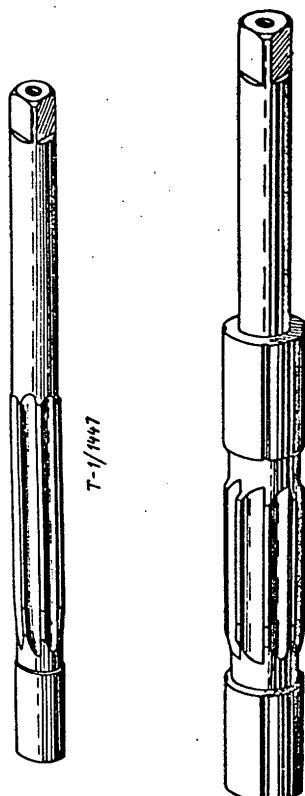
A. REAMERS FOR EXHAUST AND INLET VALVE GUIDE HOLES
